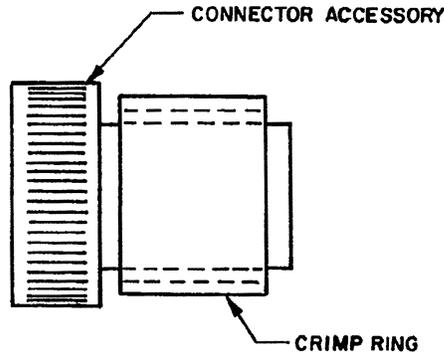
CONNECTOR ACCESSORY AND CRIMP RING (GOVERNMENT PROCUREMENT).
